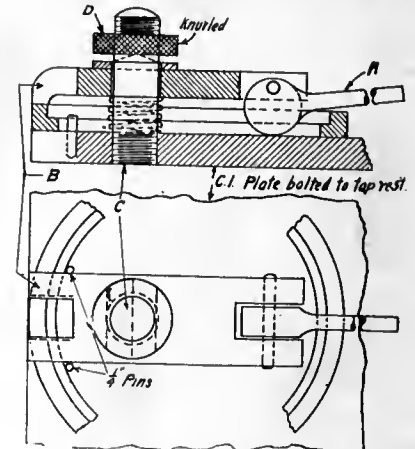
PISTON VALVE RING MACHINING—THIRD OPERATION.
